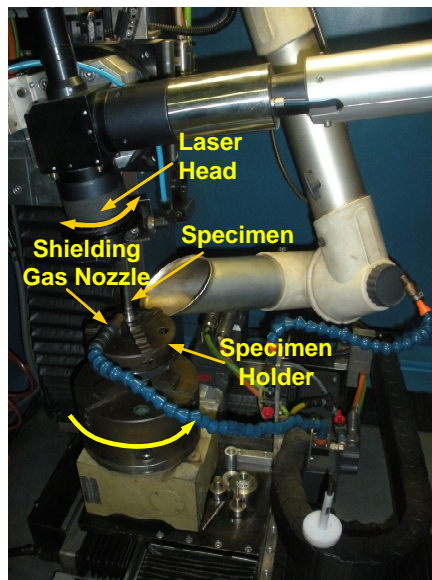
Photographic view of Nd:YAG laser-welding system
